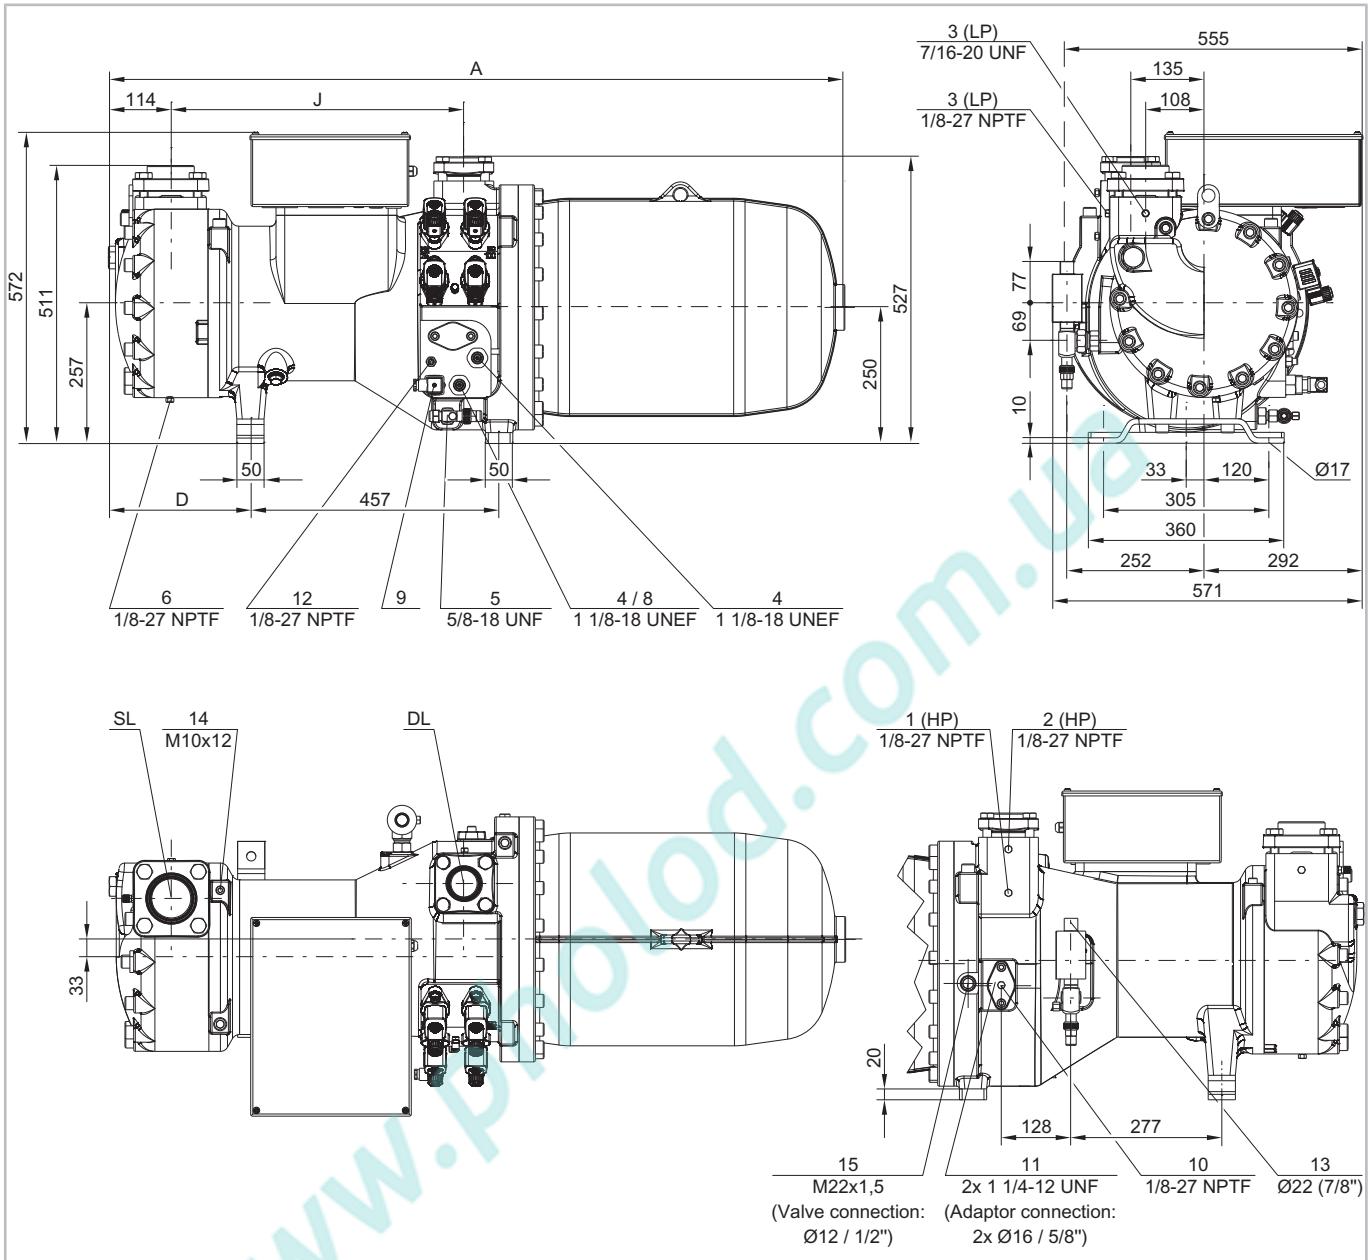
Dimensional drawing CSH7553-50Y .. CSH7593-110(Y)
